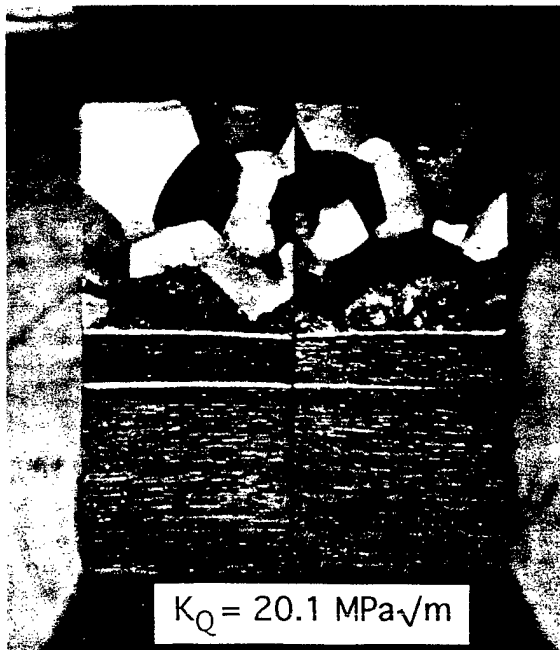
(a) Fracture surfaces of 3-point bend specimens of 93-016 showing the lack of correlation between  $K_Q$  values and overall fracture surface appearance.
